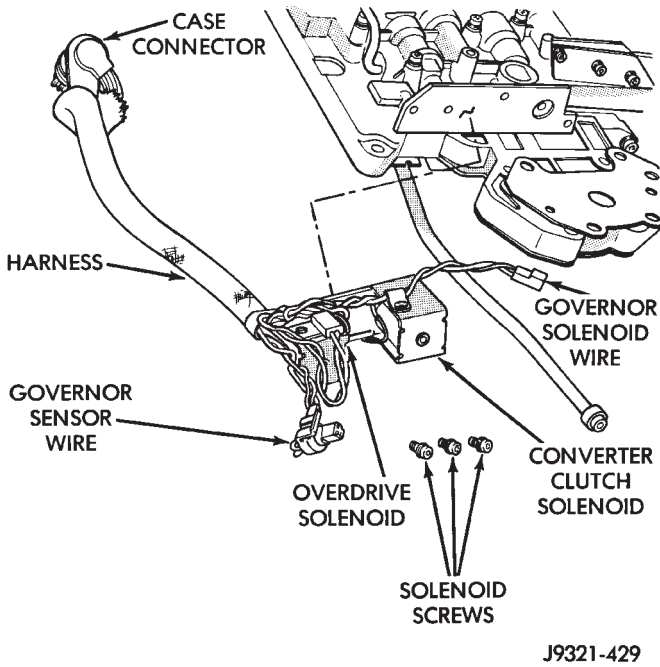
Overdrive/Converter Clutch Solenoid Assembly Removal
